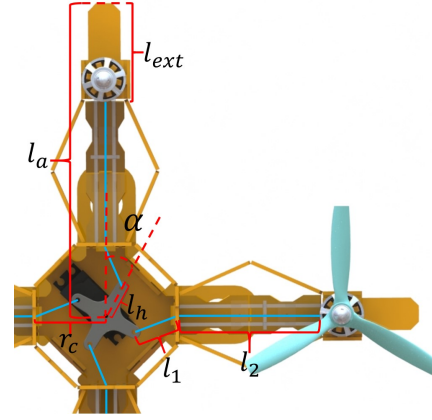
Geometry and mechanical principle of the servo-arm mechanism.
